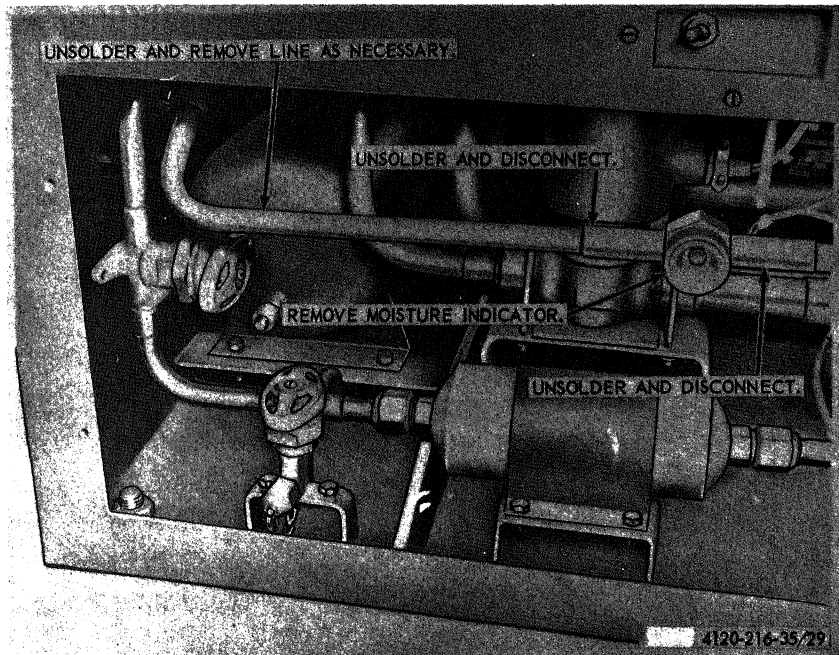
Liquid and moisture indicator and tubes, removal and installation.
